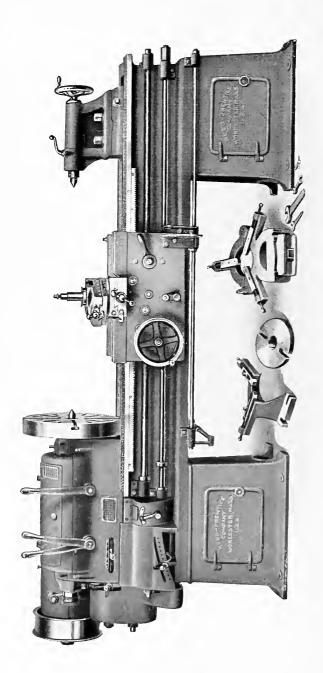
Fig. K. — Lathe with back gears and end feed change gears enclosed. (Courtesy of Reed-Prentice Company.)
